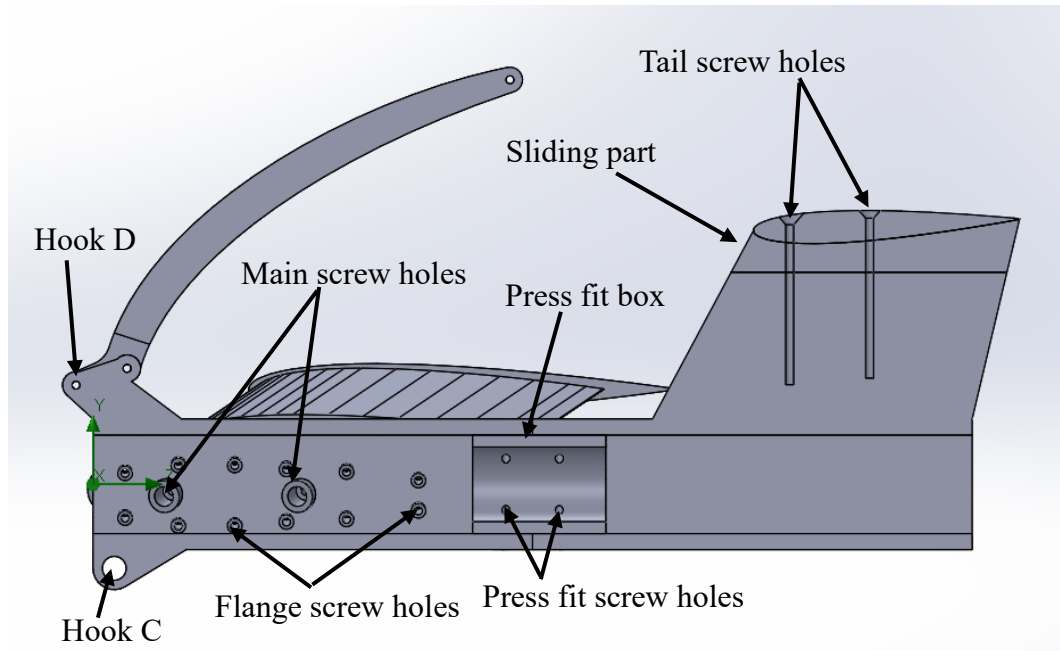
A detailed view of the fuselage, highlighting the wing flange and the press-fit box designed to hold fuselage parts A and B securely. The design includes hooks D and C, integral for attaching the lever arm and mooring line. Additionally, the figure showcases the sliding part of the tail, which is engineered to enhance stability and control by allowing adjustments to the AOA.
